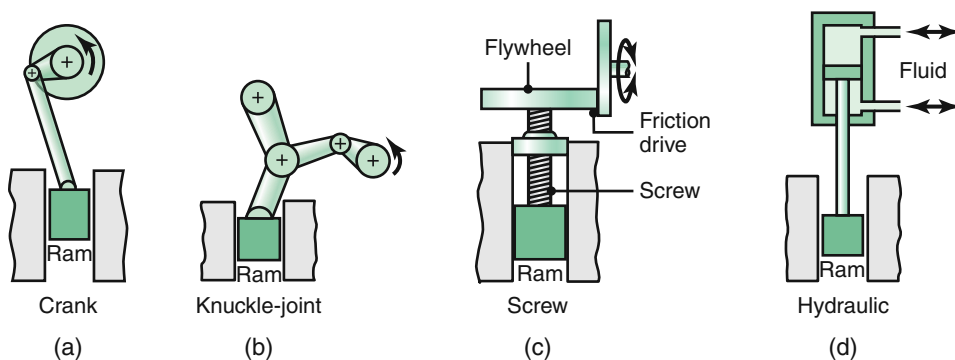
Schematic illustration of the principles of various forging machines. (a) Mechanical press with an eccentric drive; the eccentric shaft can be replaced by a crankshaft to give up-and-down motion to the ram. (b) Knuckle-joint press. (c) Screw press. (d) Hydraulic press.
